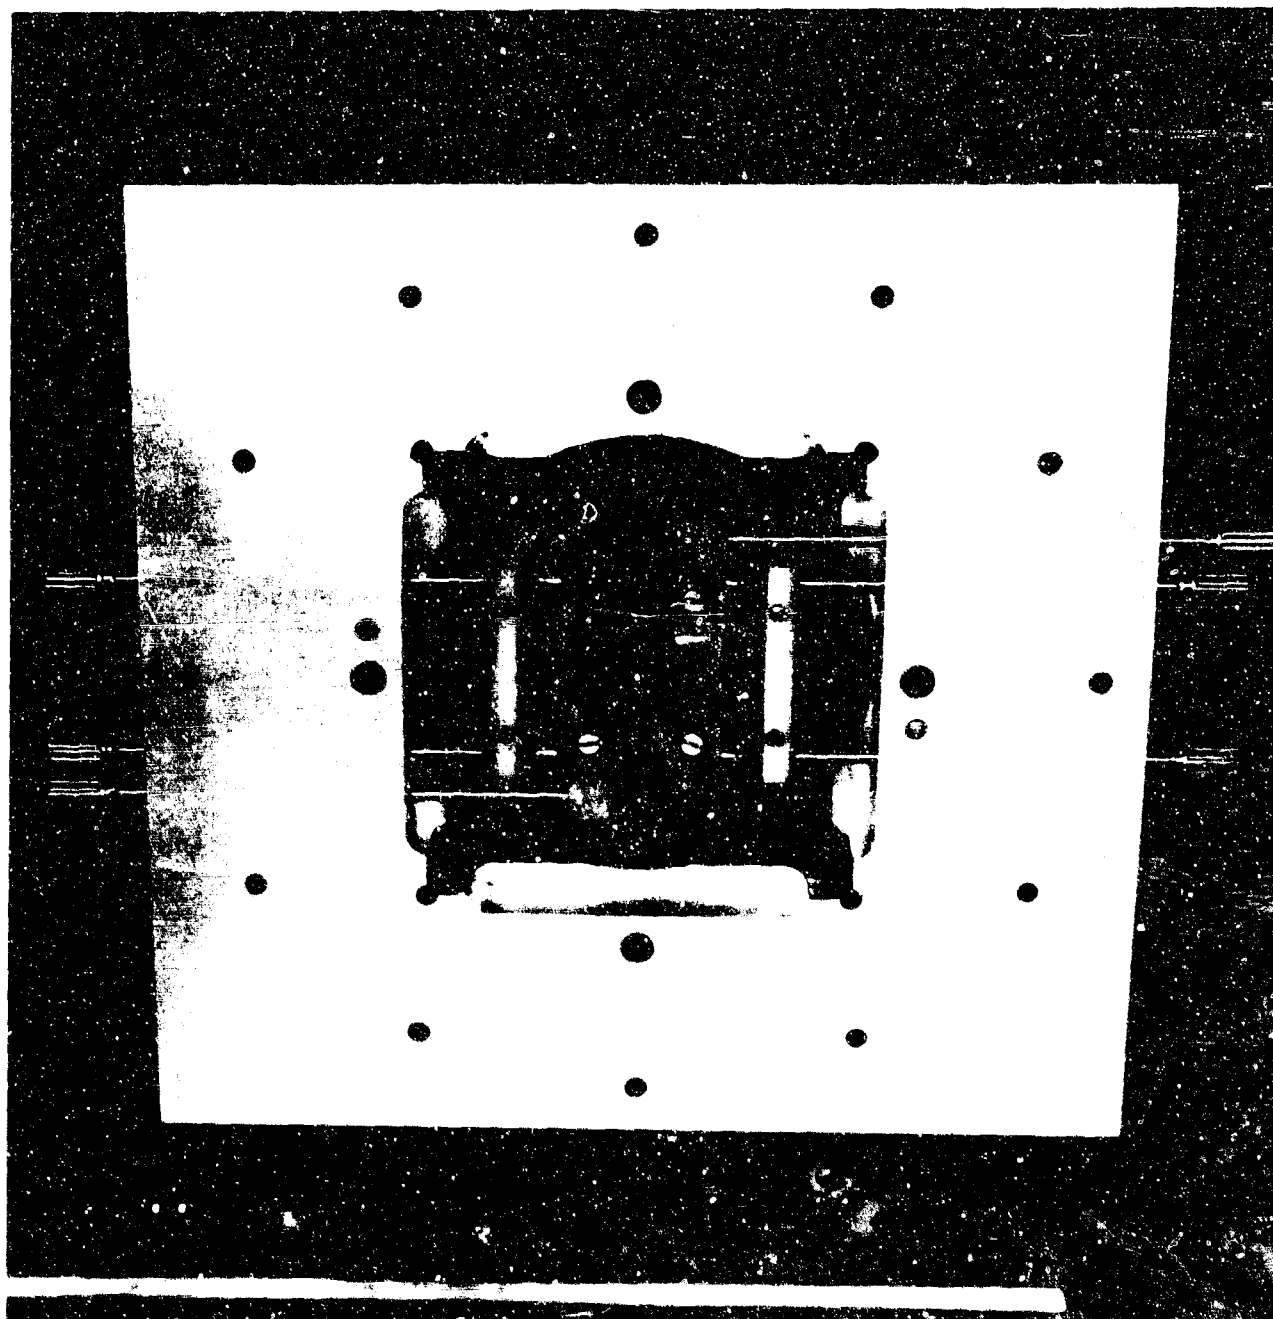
Aluminum Plate with Test Section and Housing Blocks
